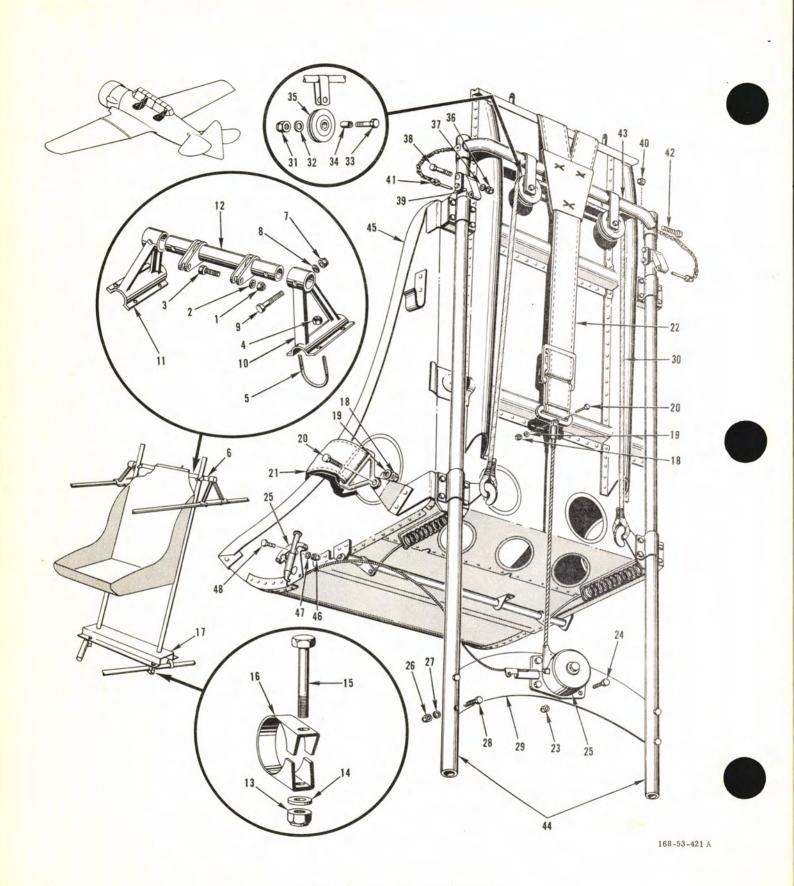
COMPLETE SEAT ASSEMBLY
